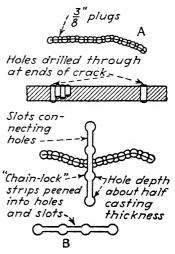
Jacket cracks can be sewed with plugs. (Courtesy of Power.)
